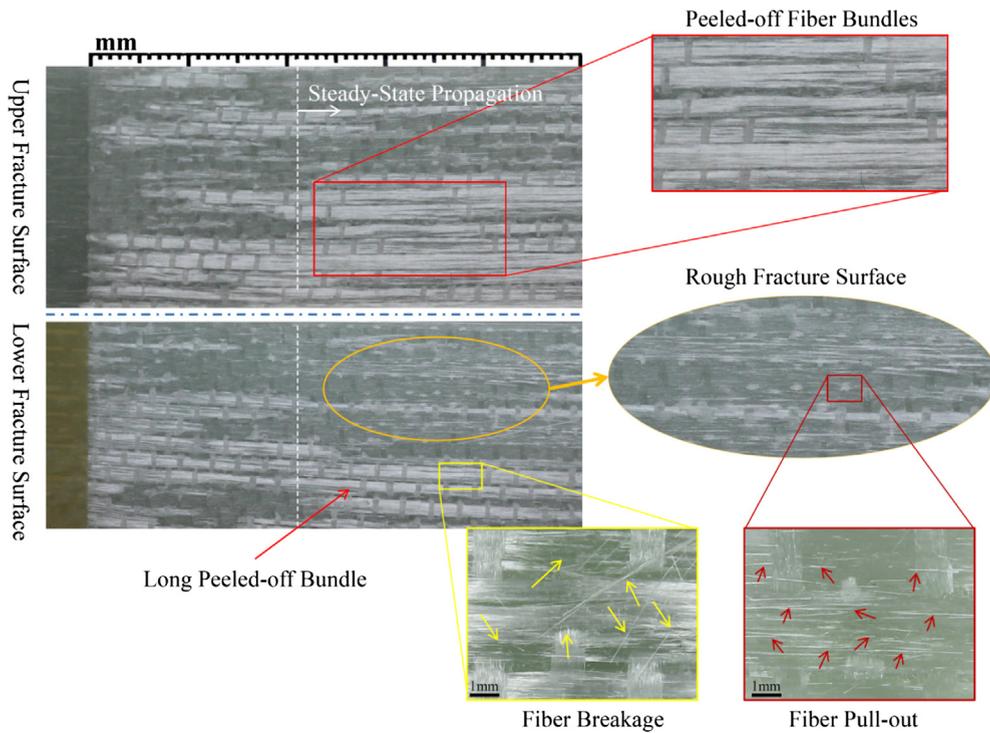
The fracture surface inspection of the glass/epoxy composite specimen at a quasi-static loading rate.
